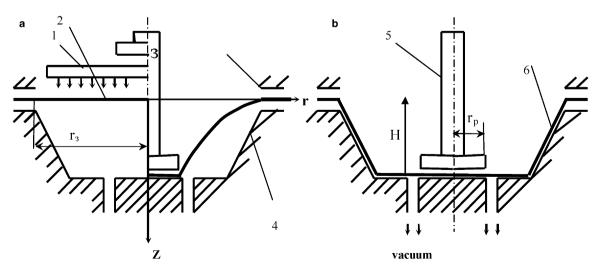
Flow diagram of mechanical-vacuum thermoforming (a—heater and plug-assist; b—vacuum thermoforming): 1—heater, 2—sheet prior to forming, 3—clamp frame, 4—mold, 5—plug, 6—deformed sheet.
